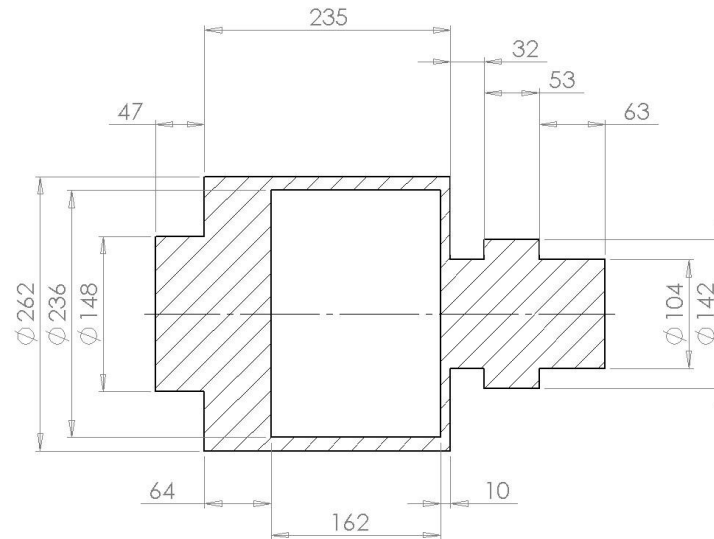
Simplified gearbox model cross-section with dimensions (mm)
